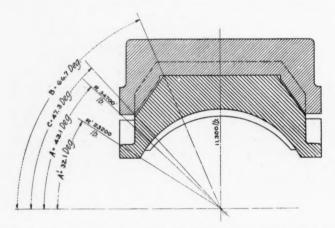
Force Action on a 5-In. by 9-In. Journal; Car Weighs 150,000 Lb.
